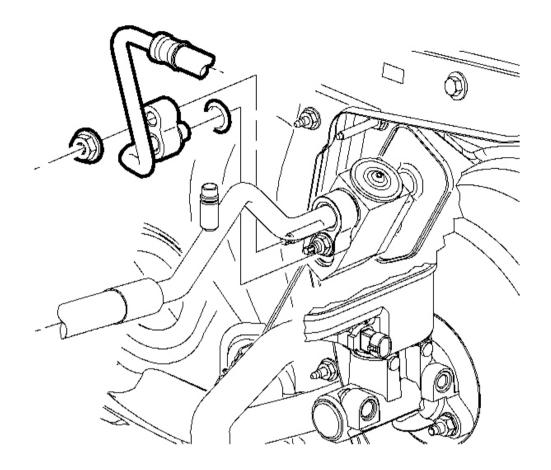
Heater Inlet, Hose Clamp & Heater Core Courtesy of GENERAL MOTORS CORP.
